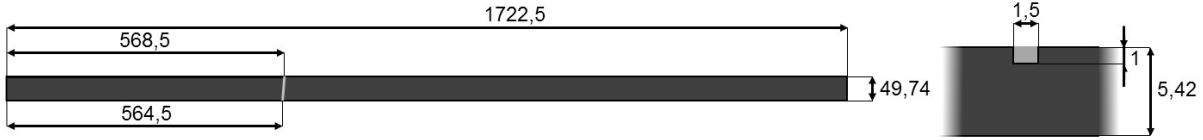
Dimensional drawing of the bar used during the experiments, on the right, seen from above; on the left, seen from the side, with detail on the dimensions of the cut. Measurements are expressed in millimeters.
